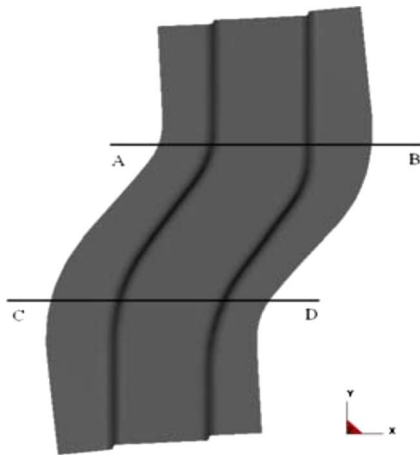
Contour of final workpiece with cutting sections AB and CD
